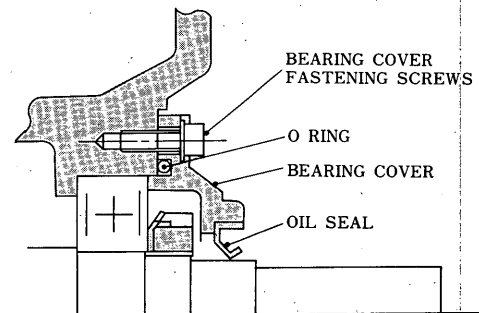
Construction of Bearing Section with Oil Seal and O Ring
